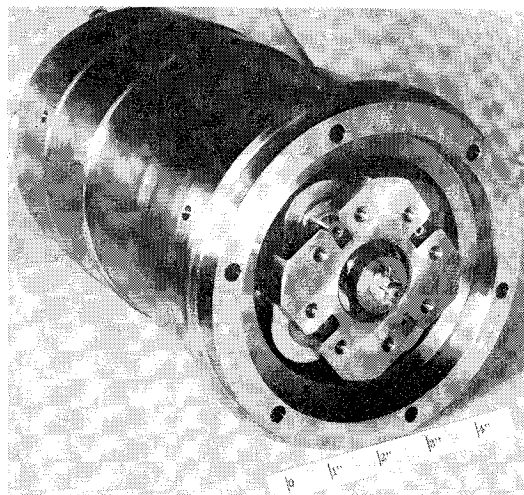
6-hp roller drive having 6.25:1 reduction ratio at 3000 rpm is mounted in the housing of an electric motor. The drive also serves as bearing for the rotor support. The unit is used on the General Motors oceanographic submarine "DOWB."
